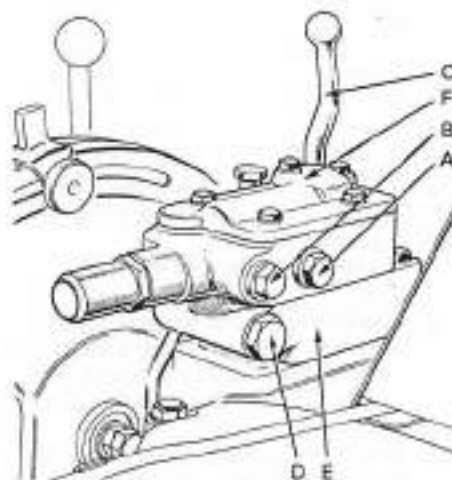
On model 1200, where special test plate which is installed in place of control valve cover (F) is not available, check pressure by connecting test gage to remote port (A or B) and pressurizing that port. Control lever must be held to keep it from returning to neutral when desired release pressure is reached. Plug (D) in adapter plate (E) seals external hydraulic return port.
